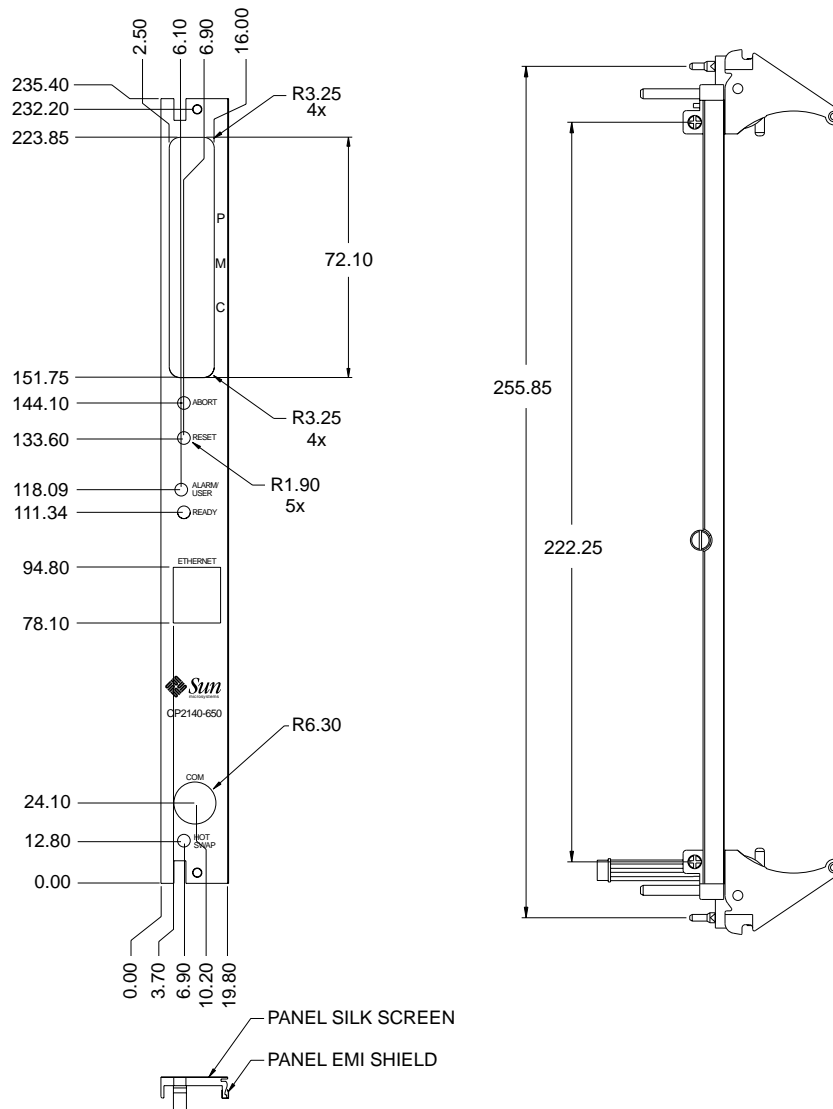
Mechanical Drawing of the Netra CP2140 Board Front Panel
